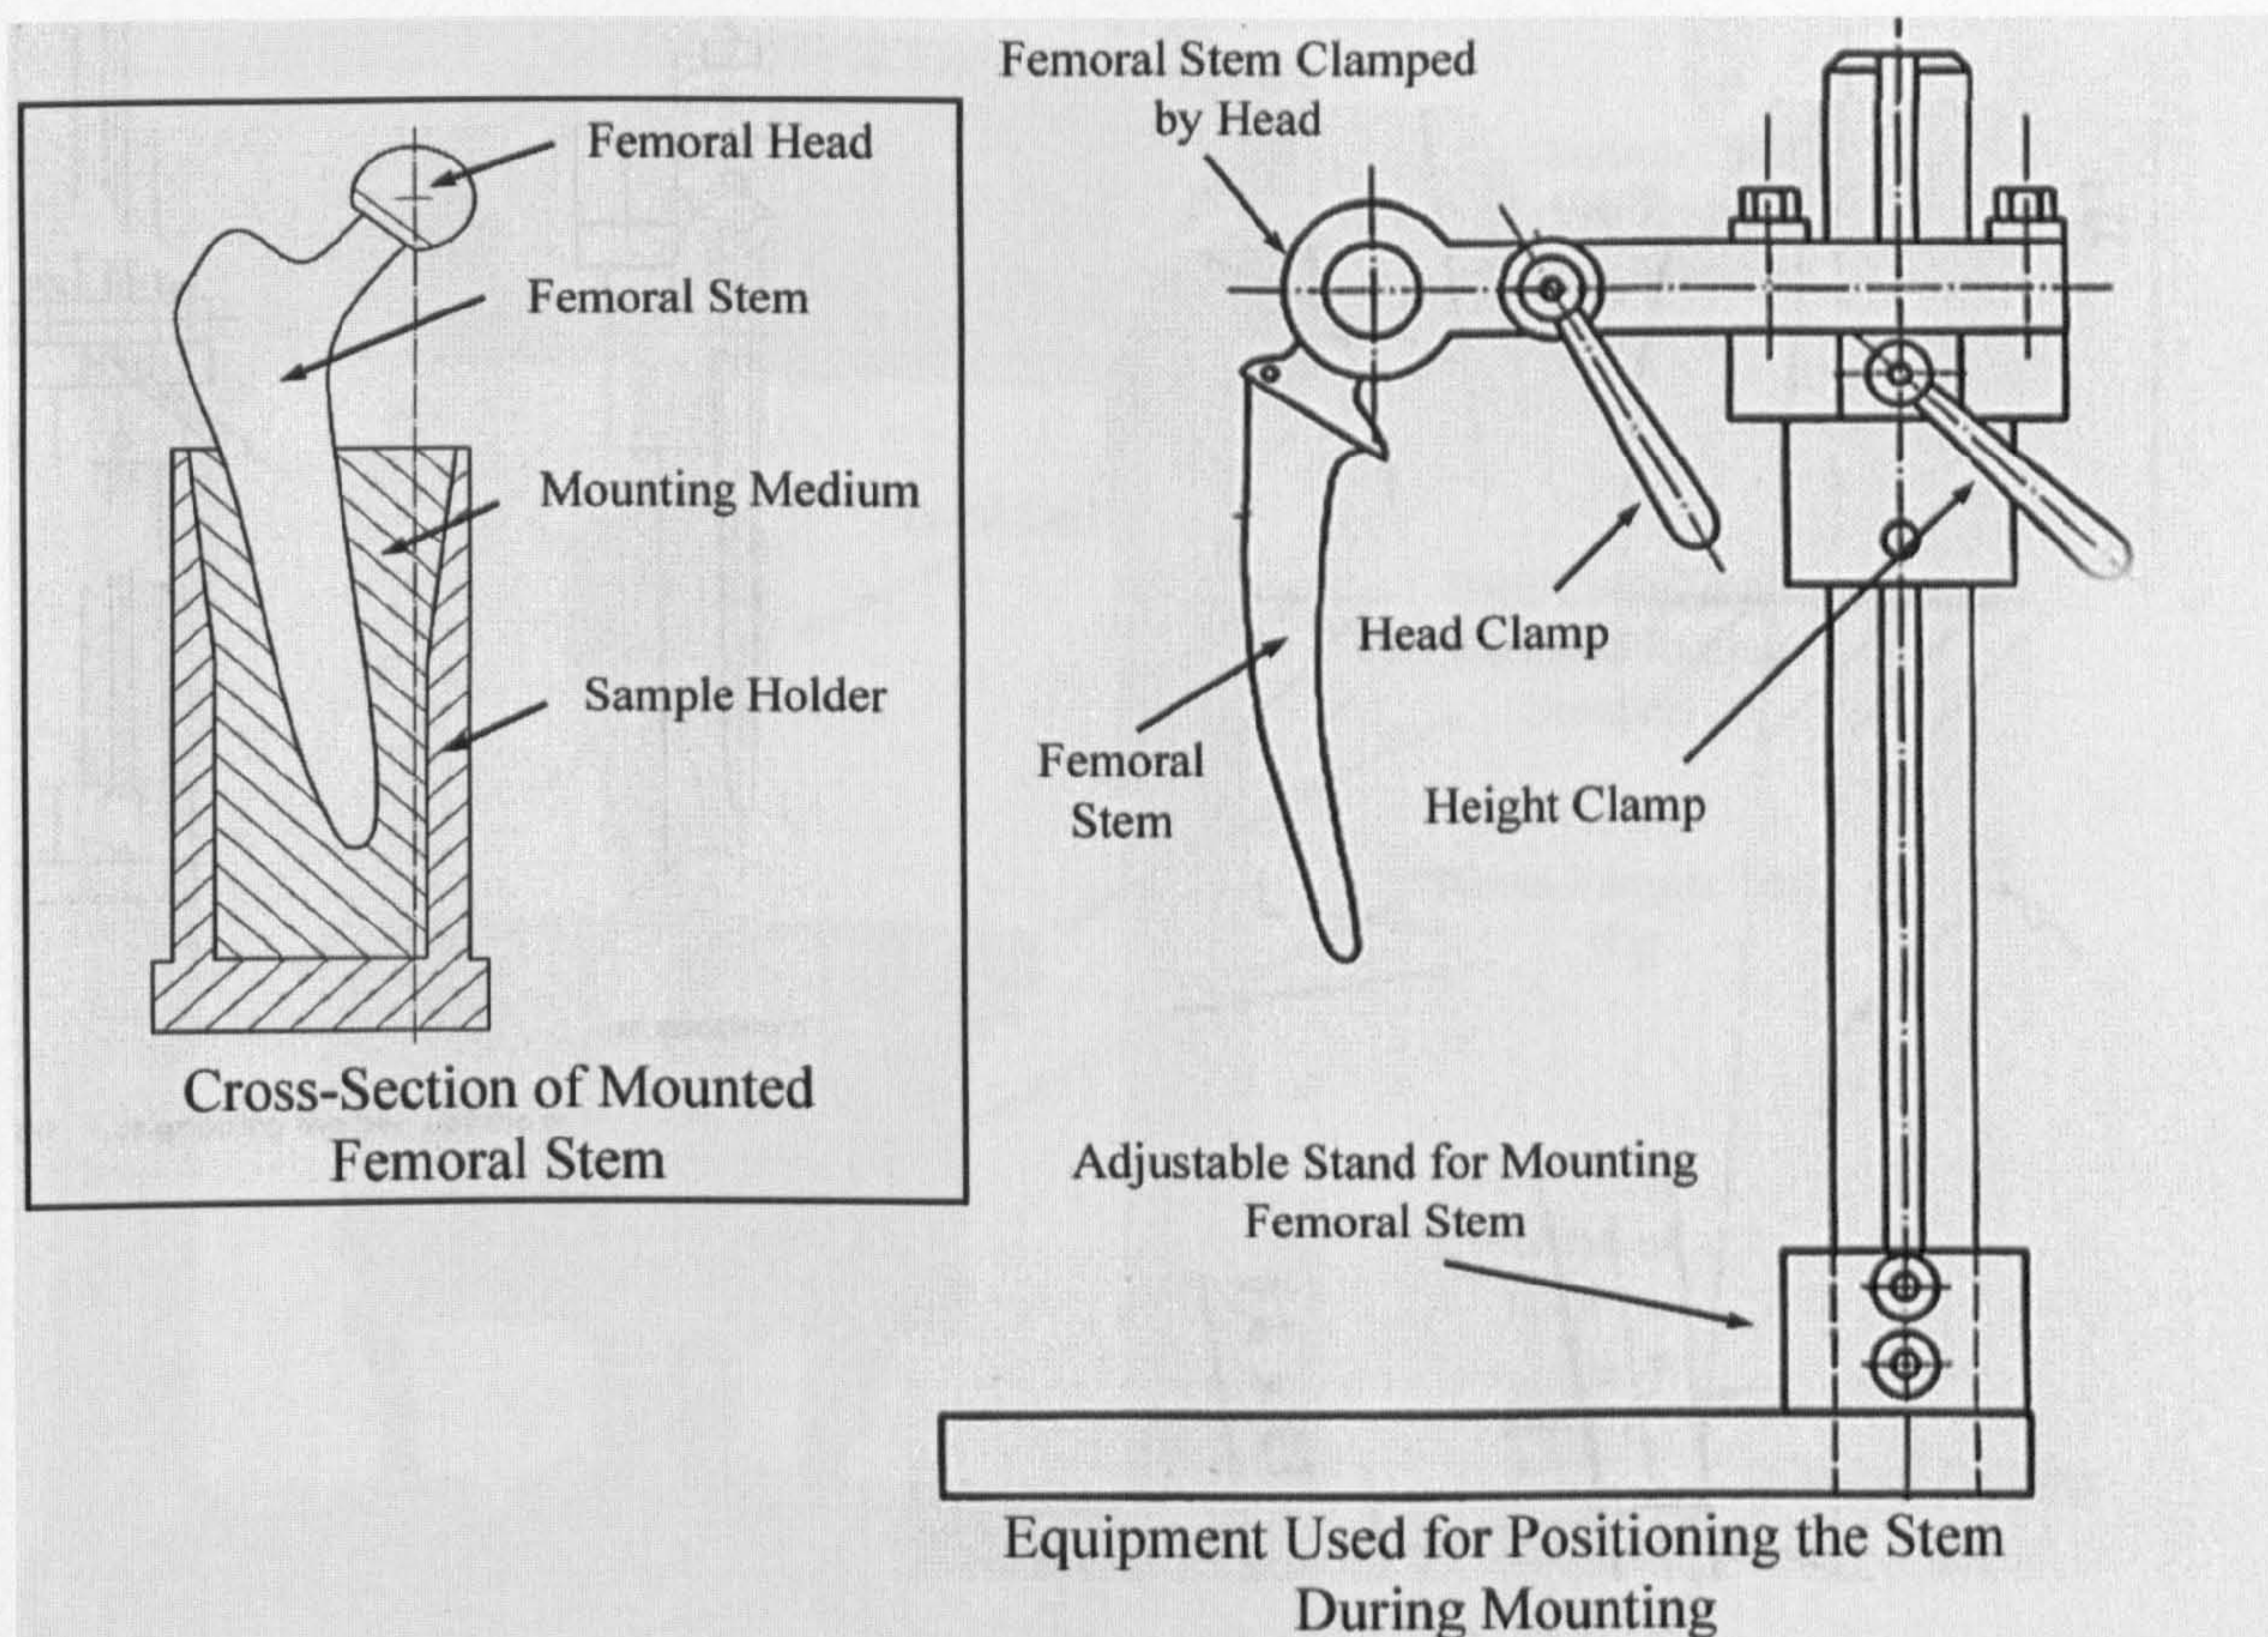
General mounting arrangement of the femoral stem for fatigue testing and cross-section of mounted femoral stem (insert)
